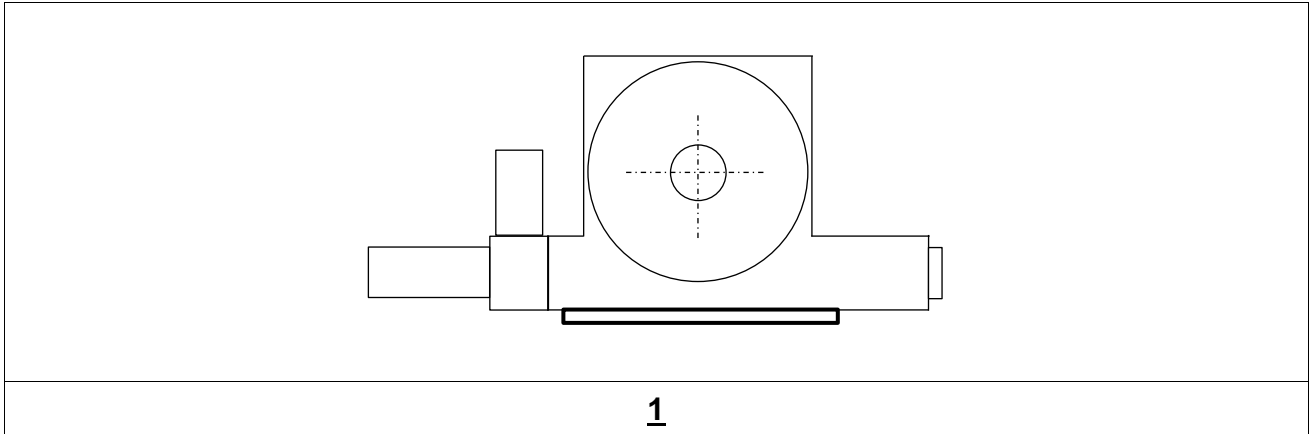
Bearing Hydraulic damping SIGUREN UNIT<sup>®</sup> with mounting plate
